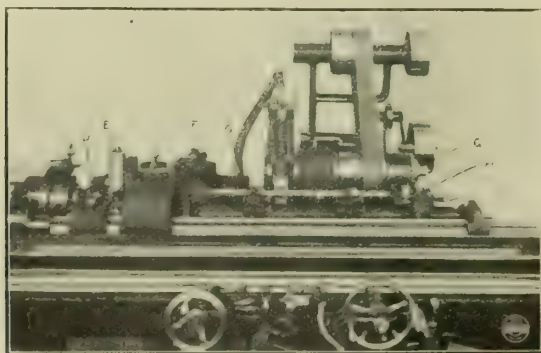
INTEGRAL CAM GRINDING ATTACHMENT.
